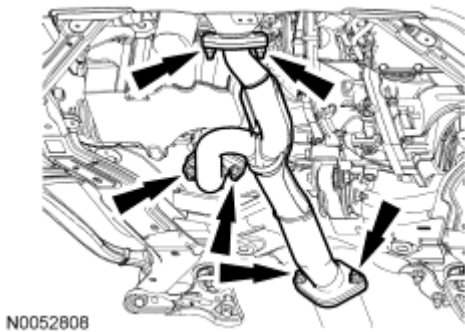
Locating Y-Pipe Nuts & Y-Pipe Assembly
